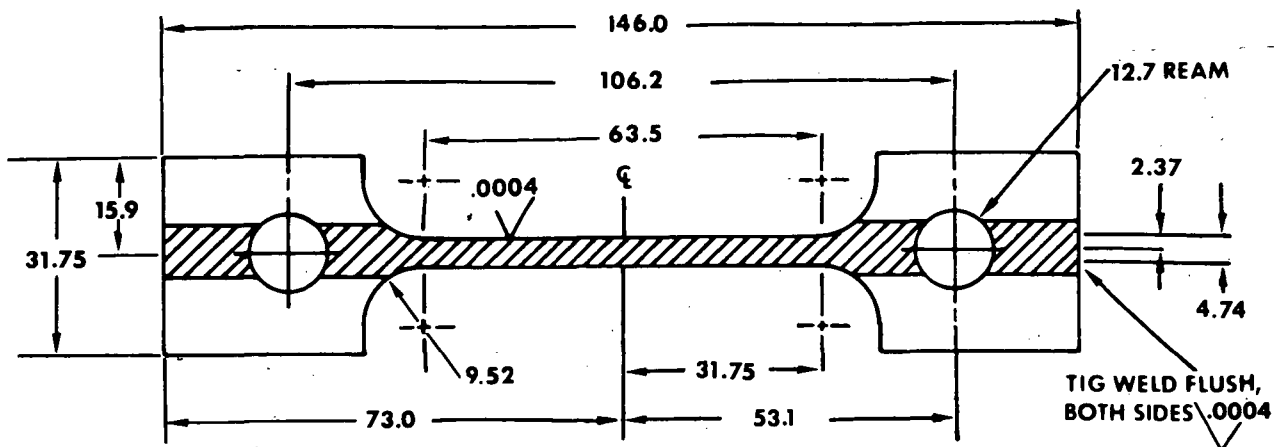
ALL WELD METAL TENSILE SPECIMEN CONFIGURATION
